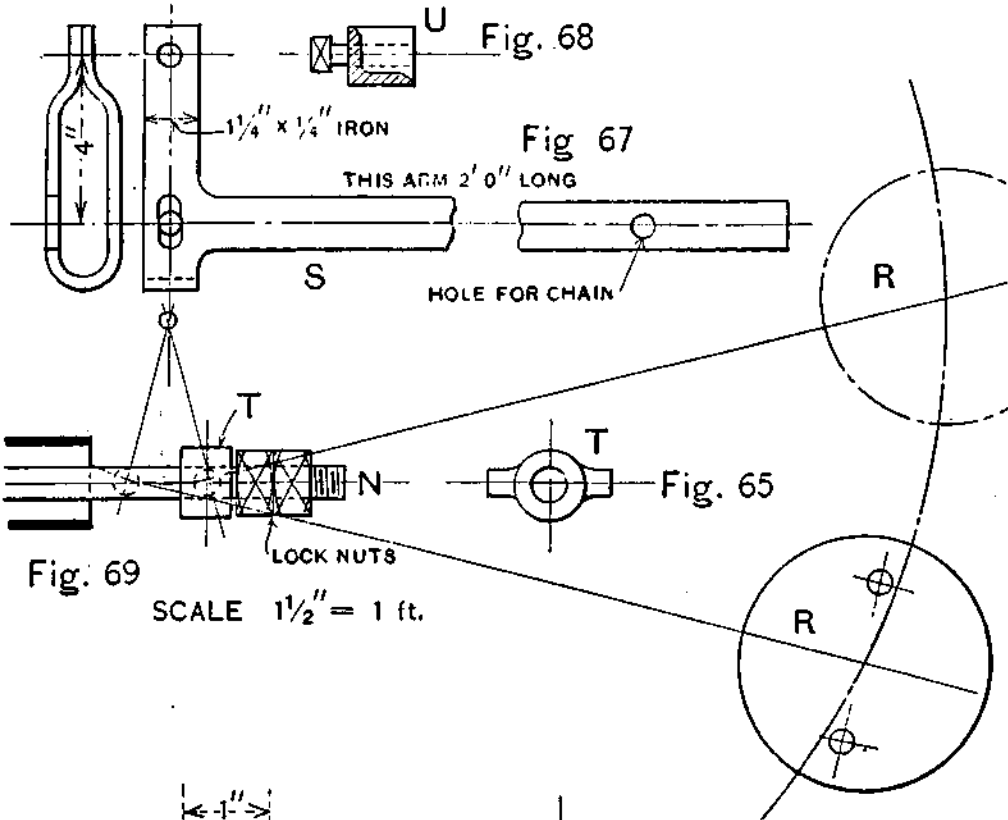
Three Views of Crank K. Fig. 65.—End View of Pin Bearing. Fig. 66.—End View of Weight R. Fig. 67.—Side and End Views of Weight Lever. Fig. 68.—Section of Angle F with Stiffening Block. Fig. 69.—Tail-End of Sliding Rod and Pin Bearing.
